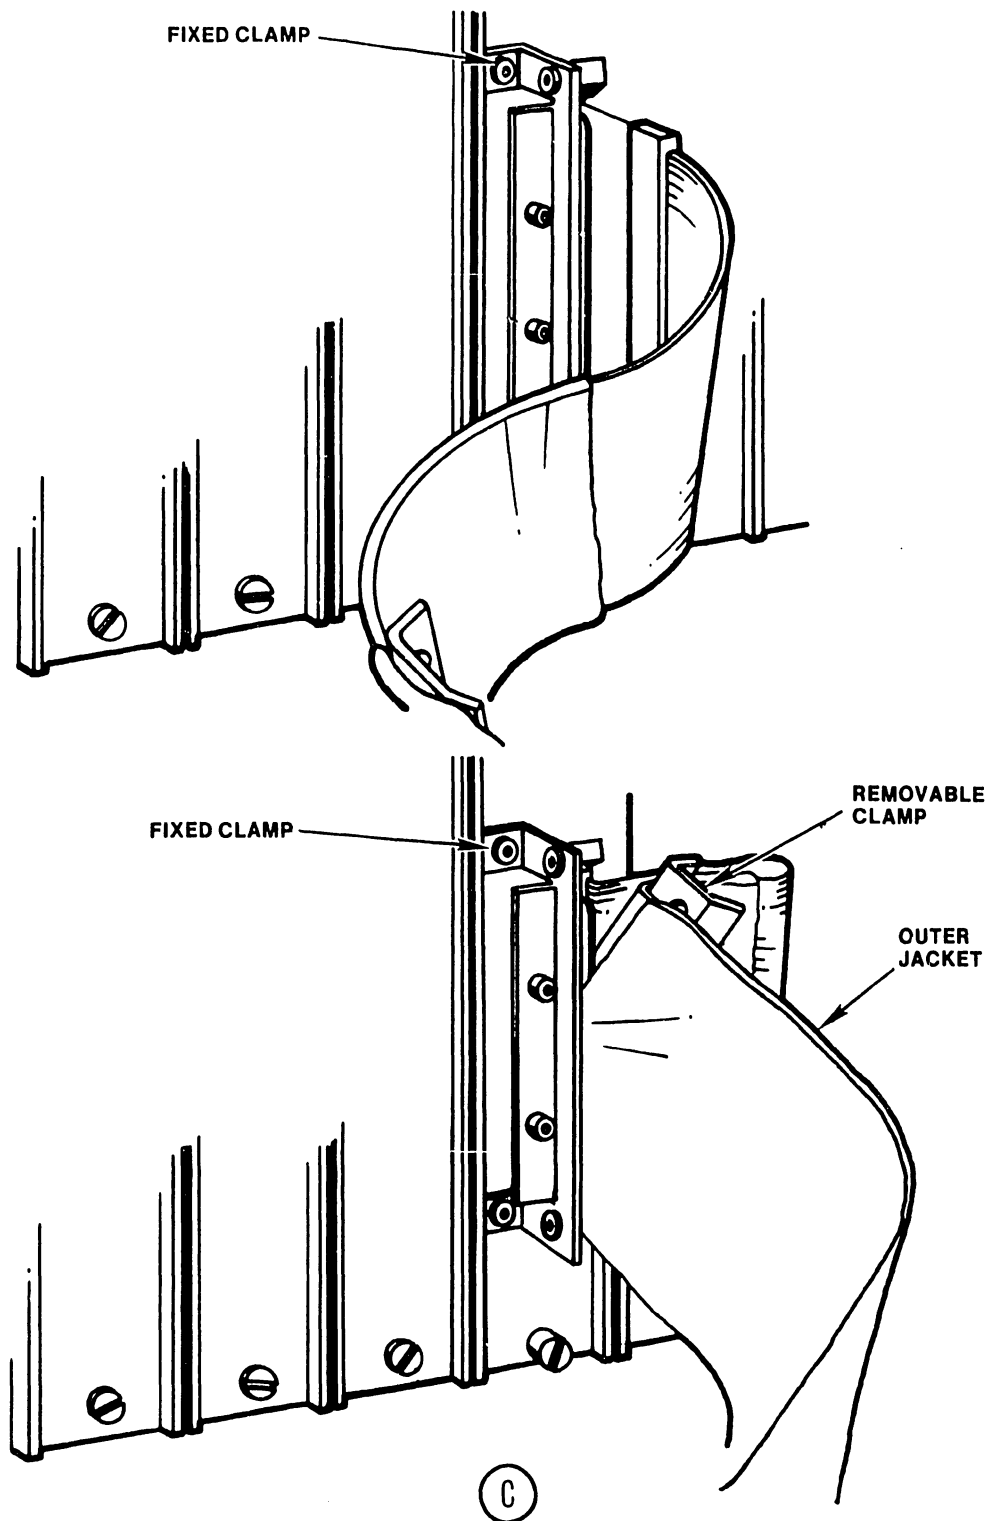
Shielded Cable Installation (Sheet 2 of 3)
